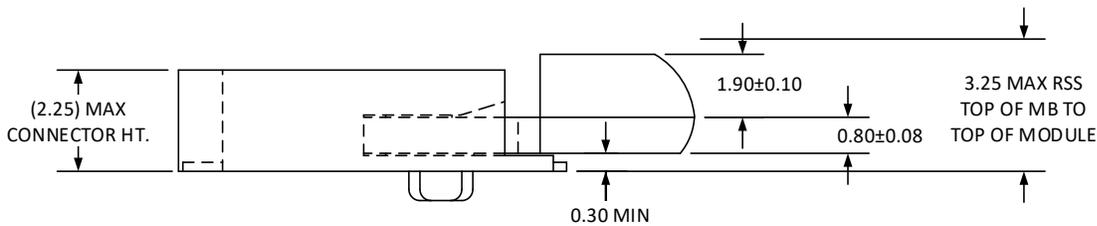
H2.3-S5- Stack-up Top Mount Single-sided Add-in Card for 2.00 Maximum Top-side Component Height and with Higher Clearance above Motherboard
